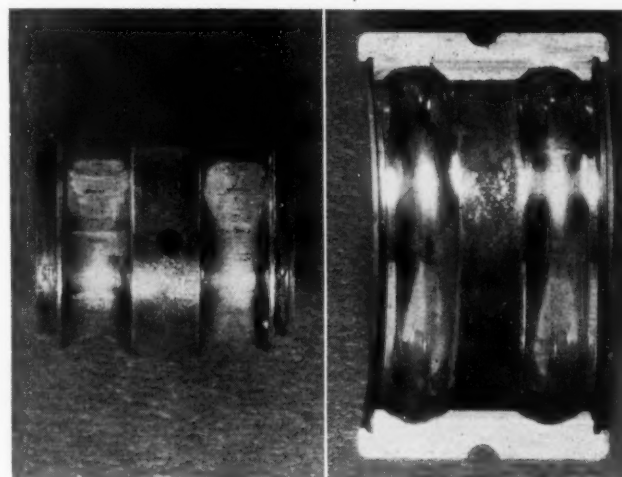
AIRCRAFT-ENGINE ROCKER SHAFT BEARING THAT WAS DAMAGED IN SERVICE BY ENGINE VIBRATION
